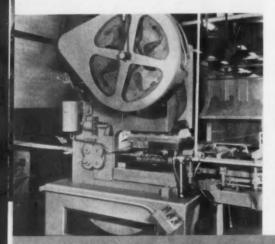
Strip steel is pierced, lanced and tormed on this Precision 75-ton Flexopress.
